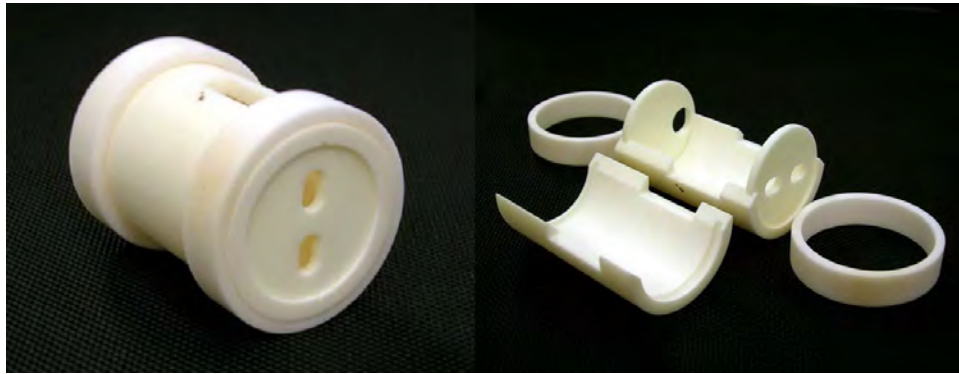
Alumina susceptor used for high temperature (1100°C) steam testing assembled (L) and disassembled (R)
